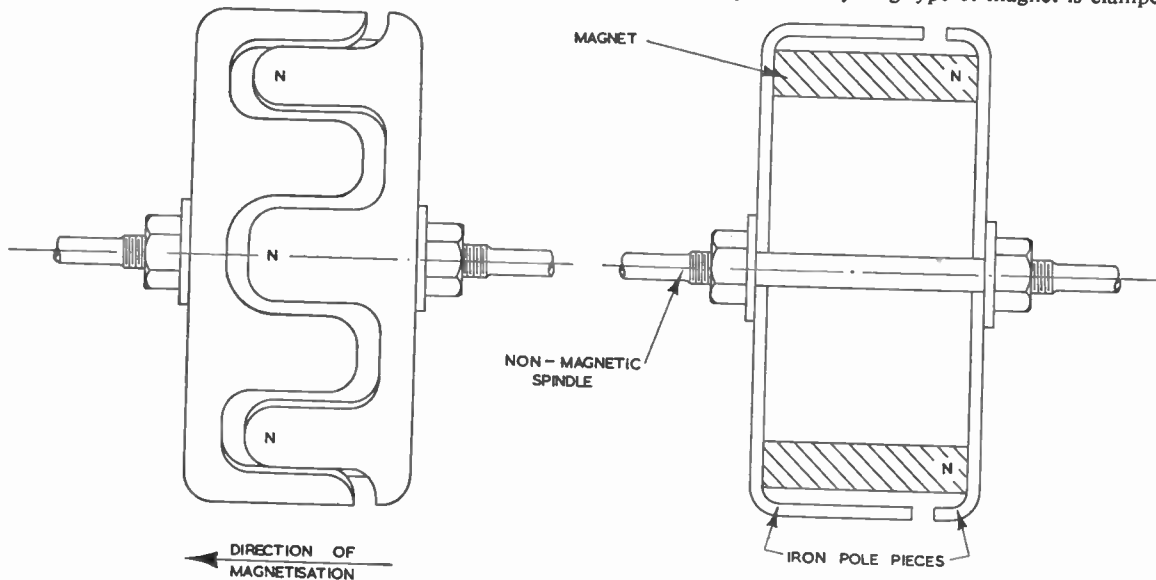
A multipolar rotor using a ring type anisotropic magnet.
